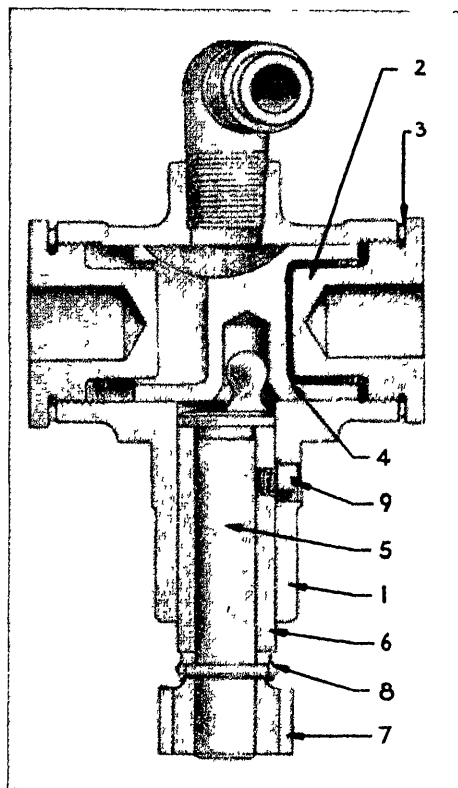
Plunger type oil pump, 1935-47 All & 1948-52 Eight
